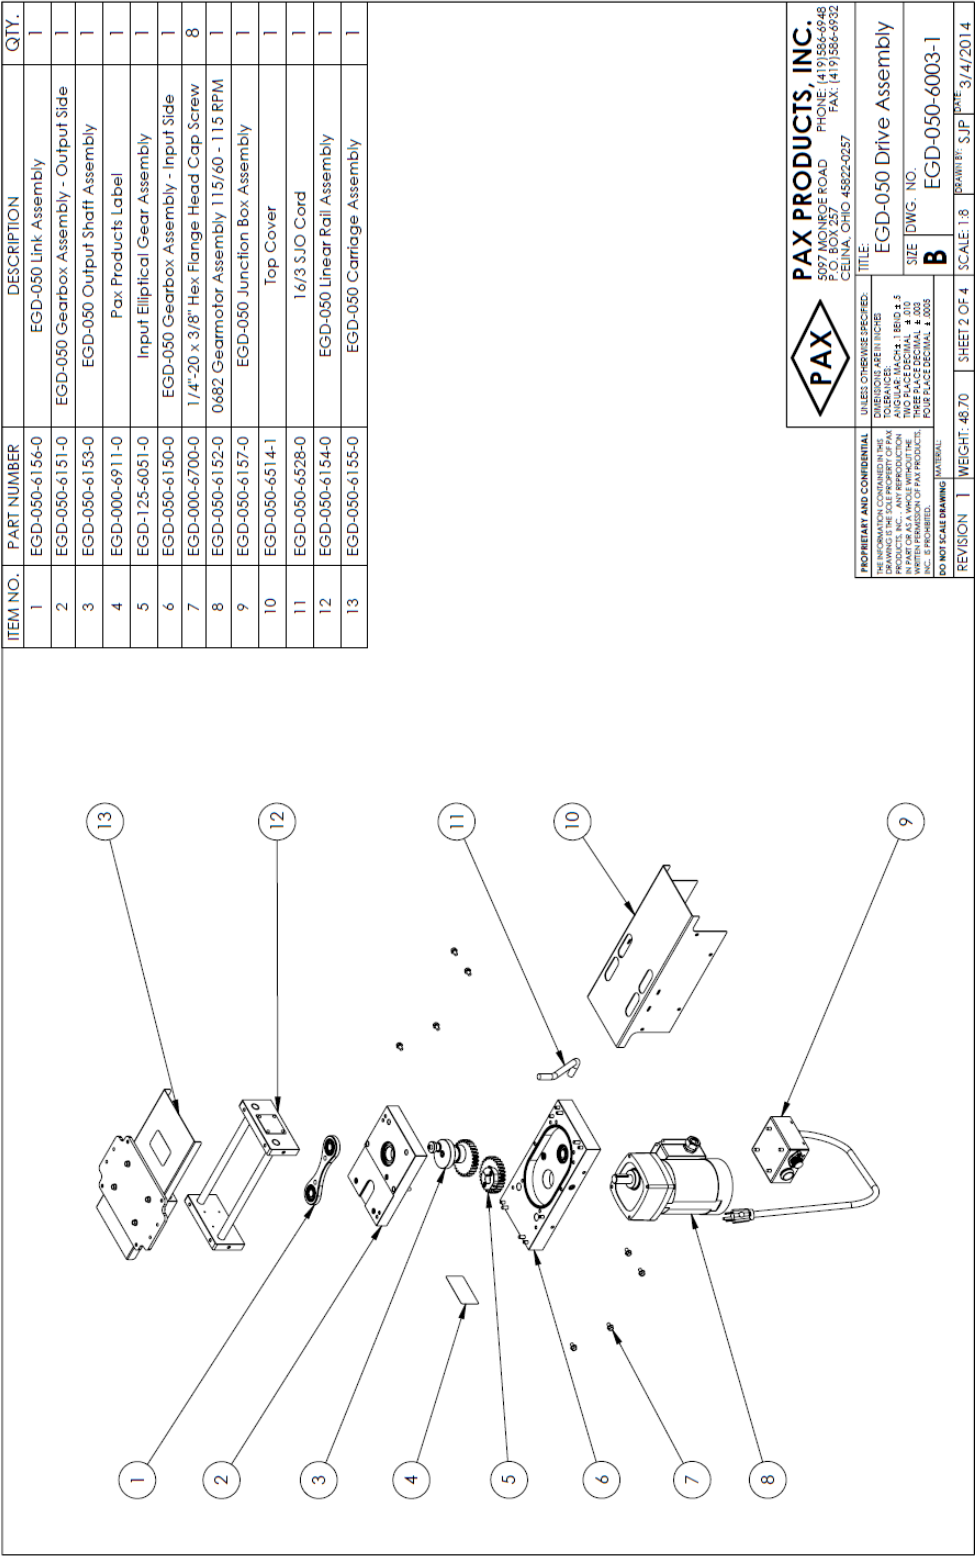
EGD-050 DRIVE UNIT ASSEMBLY
